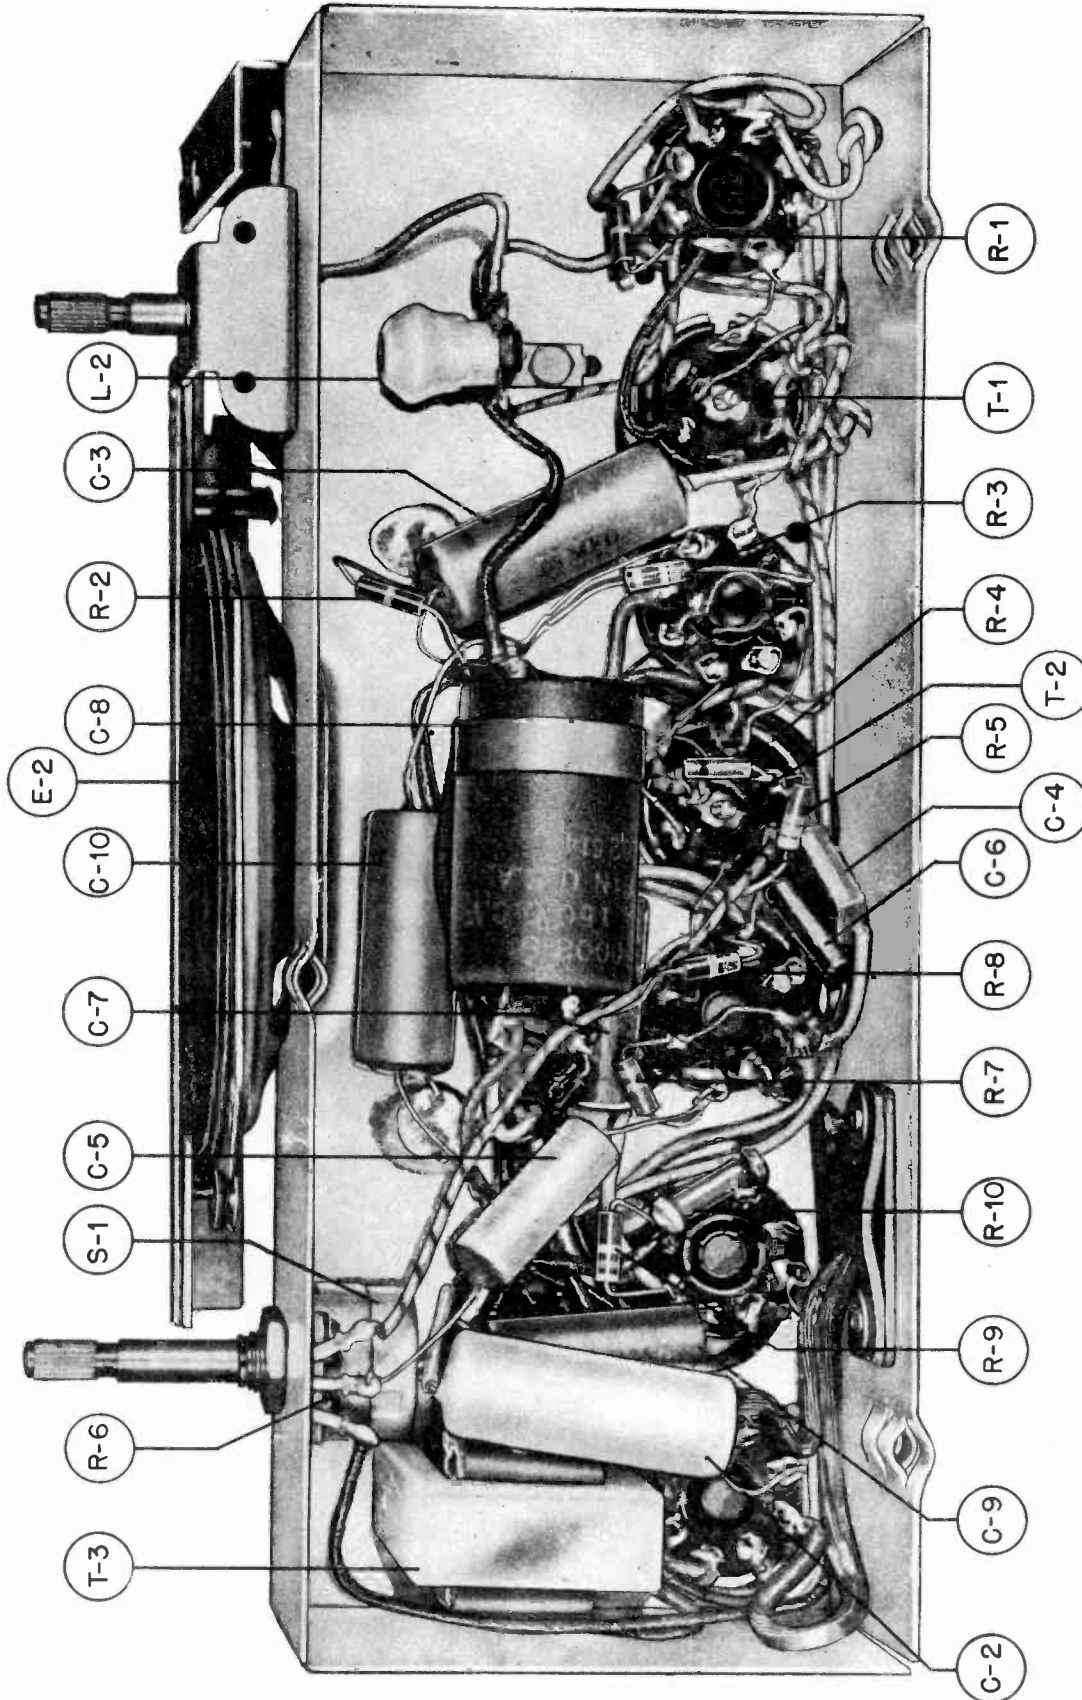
BOTTOM VIEW (CHASSIS HS-50)
